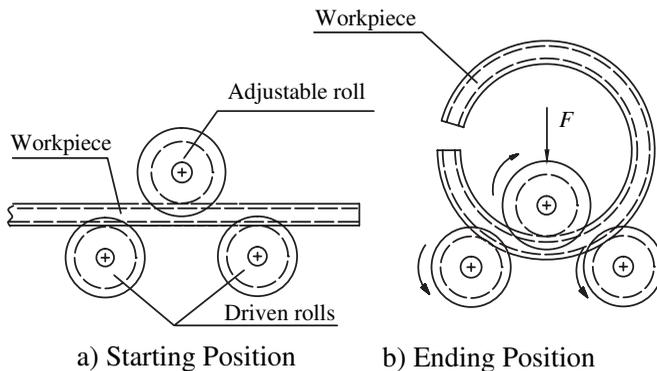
Roll Bending: a) Starting Position; b) Finished
